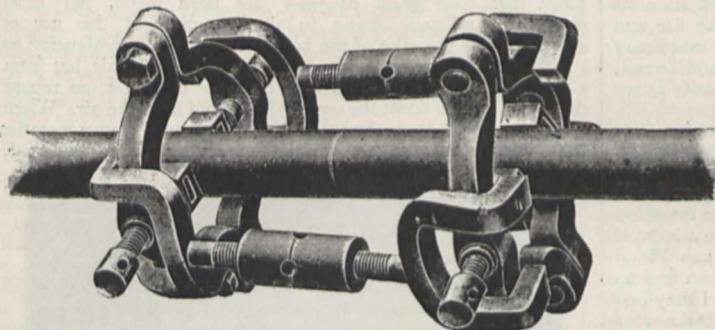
The clamps used for welding tubes up to four inches in diameter.
